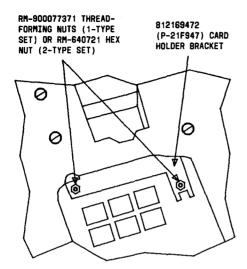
Card Holder Bracket Installed (TOUCH-TONE Set)
